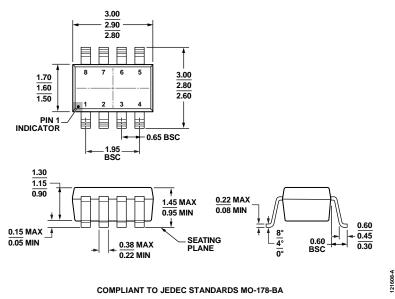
8-Lead Small Outline Transistor Package [SOT-23] (RJ-8) Dimensions shown in millimeters
